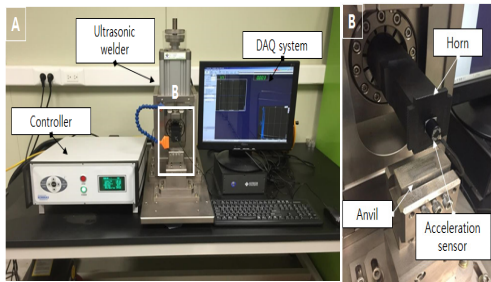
A) Ultrasonic metal welding matching setup, B) configuration of horn, anvil, and acceleration sensor
